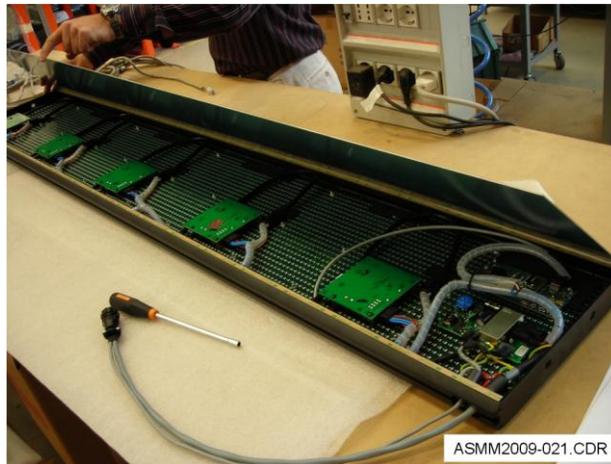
Accessing HG 320.200X24/1 YW Slim 2-type Front Sign Components
